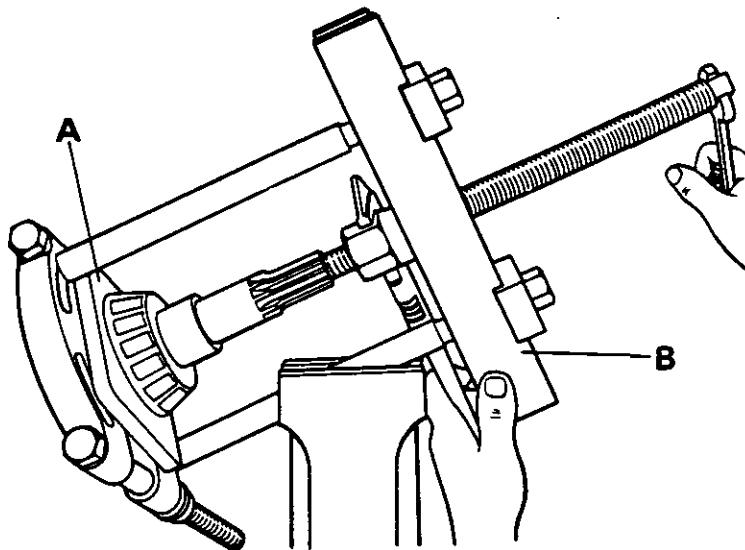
REMOVING INNER BEARING AND SPACER FROM BEVEL PINION
